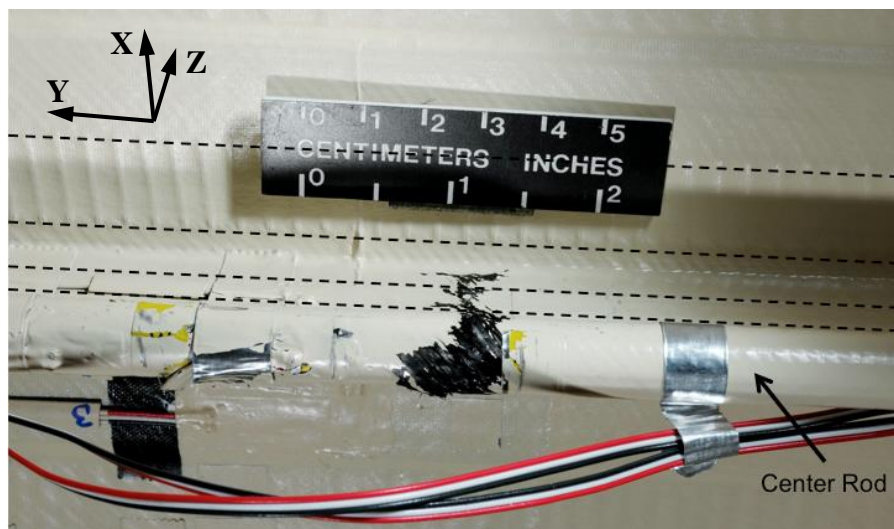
Crushing failure of the center stringer. The dashed lines identify stitch locations.
